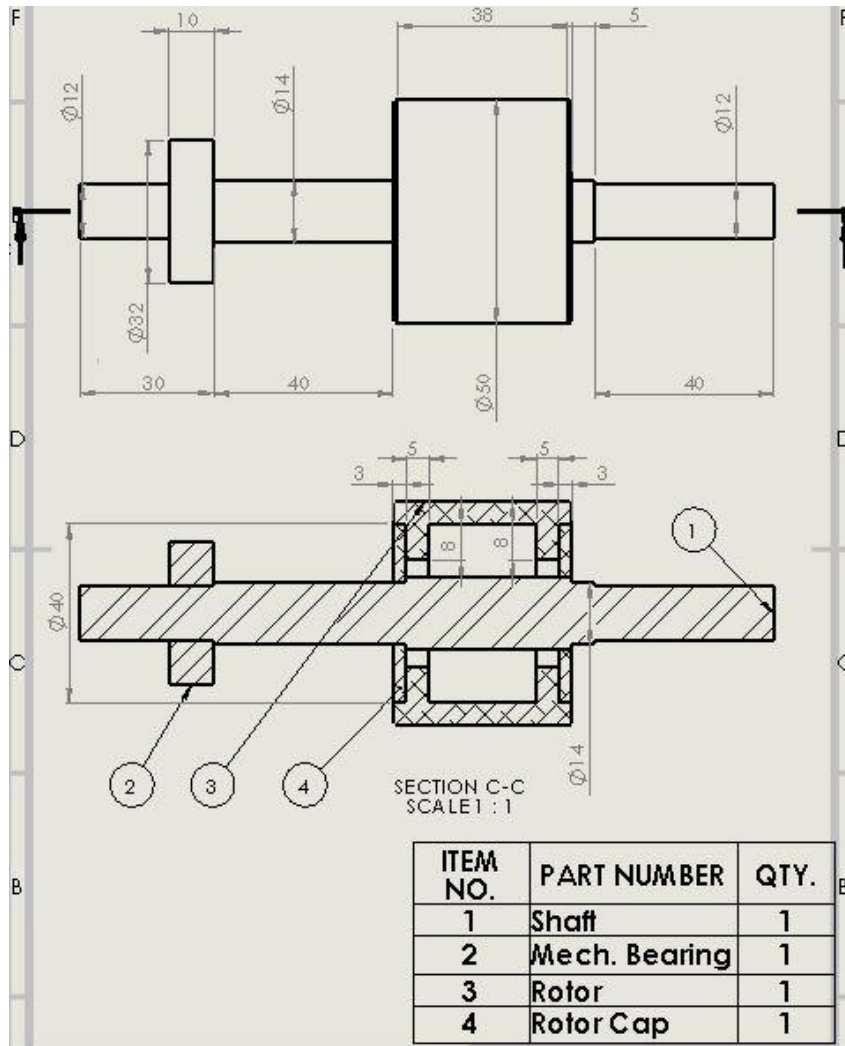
Manufactured rotor for the electrical motor technical drawing.
